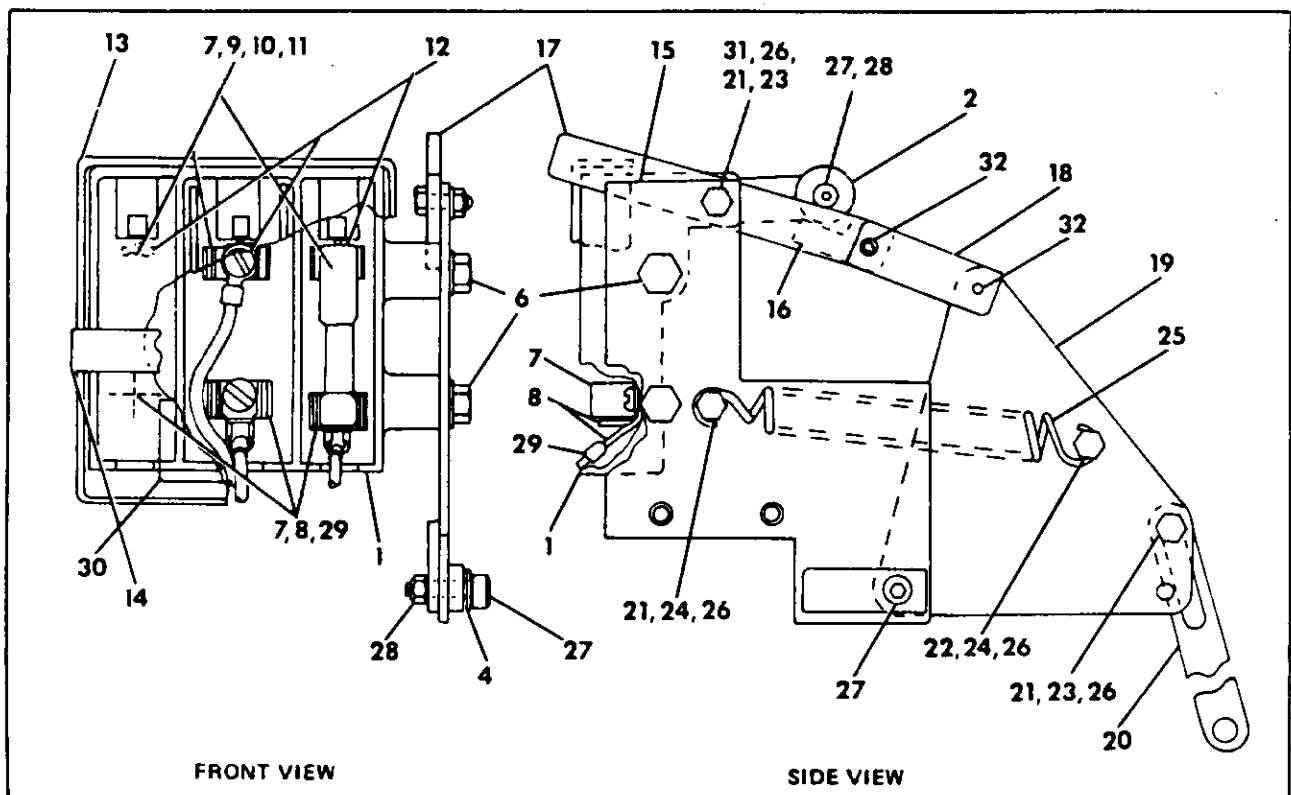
LAF-600B, LAF-800A and LAF-1600B Open Fuse Trip Device, Trigger Fuse Assembly
